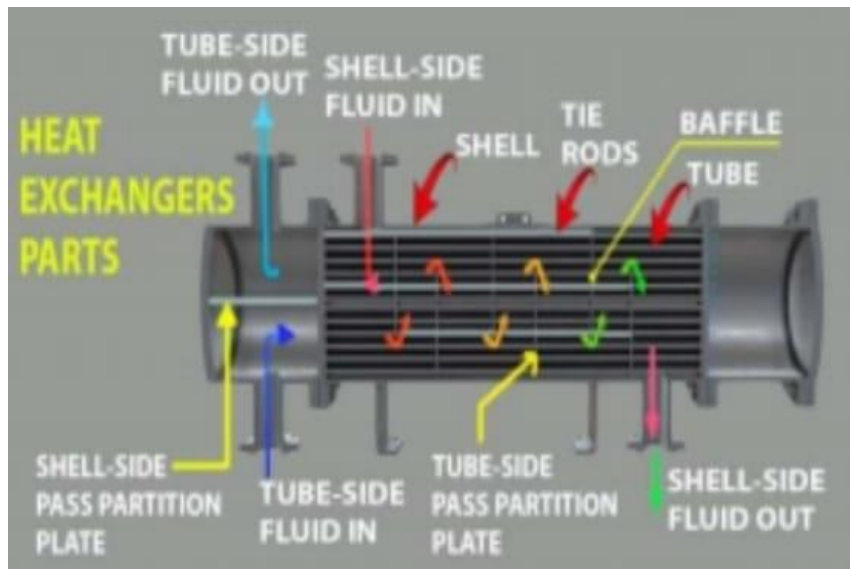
(b) – Parts of Shell & Tube Heat Exchanger(ii)
